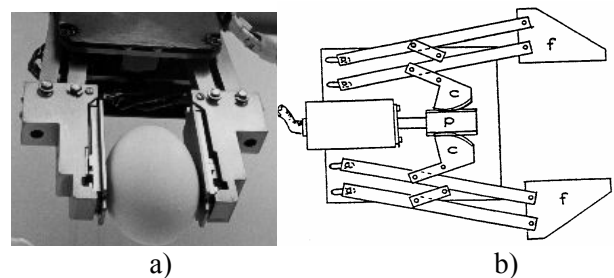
An IBM-7565 gripping device, [19]: a) a view; b) mechanical design, [20].
